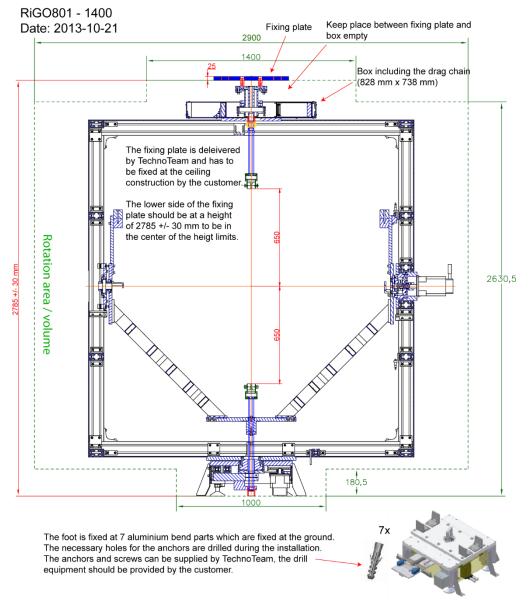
Schematic sectional drawing of RiGO801 - 1400
